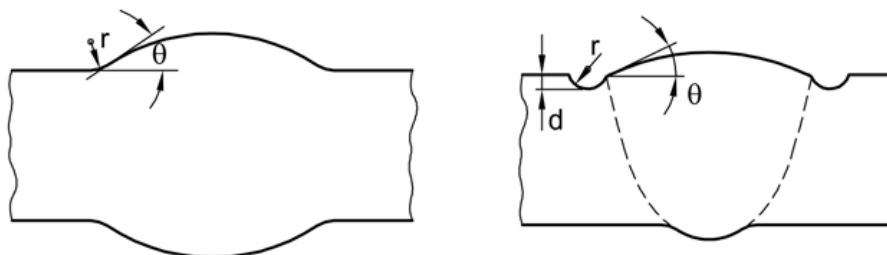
Rounding of weld toes of a butt weld and a butt weld with undercut (Fricke, 2008)
